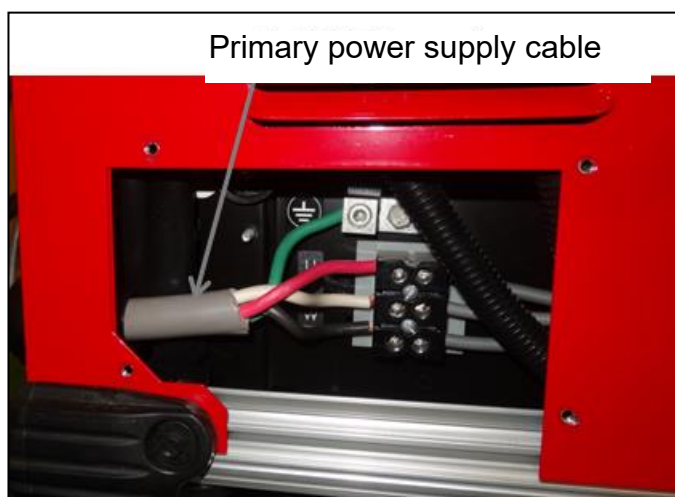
(g) Primary power supply cable of welding power supply Power Wave J350, Power Wave R500, Power Wave R450
